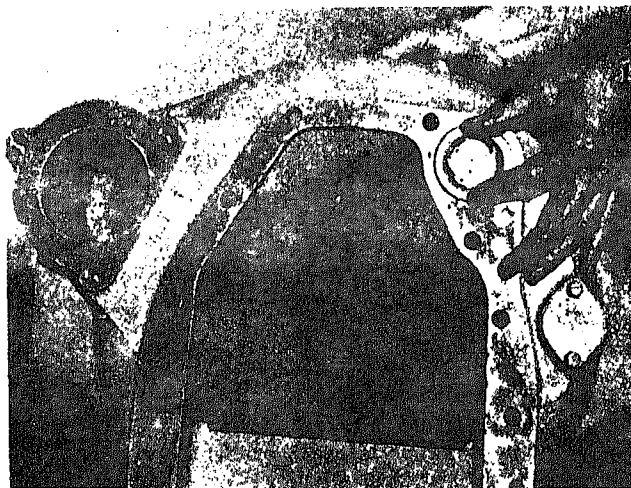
Installing gasket in camshaft counterbore of flywheel housing
